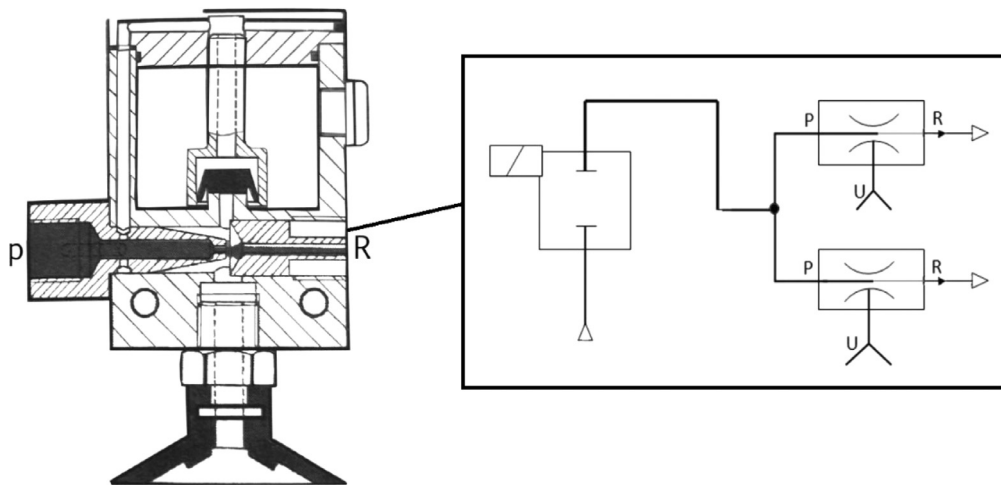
The pneumatic circuit used in the suction system (vacuum gripper).
